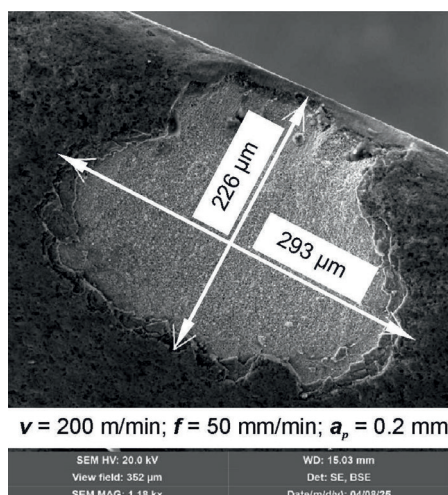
SEM image fragment of the rake face of a cutting insert with coating fracture and delamination
